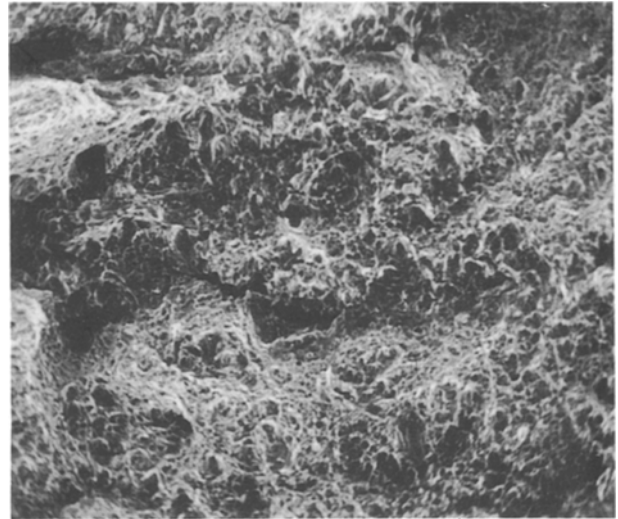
Fracture surface of uncharged specimen tested at 293 K, X 300.
